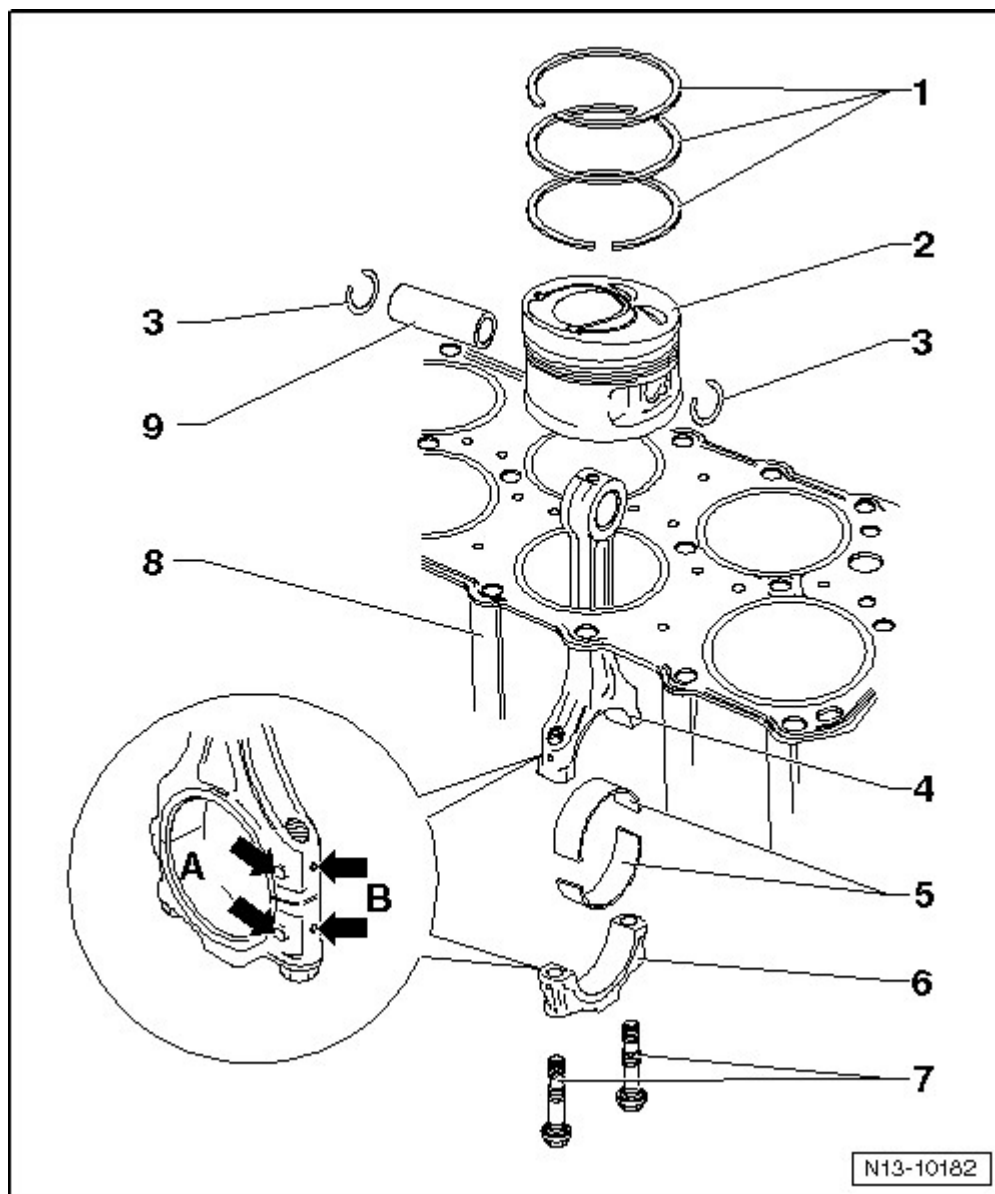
Identifying Piston And Connecting Rod Assembly Overview
